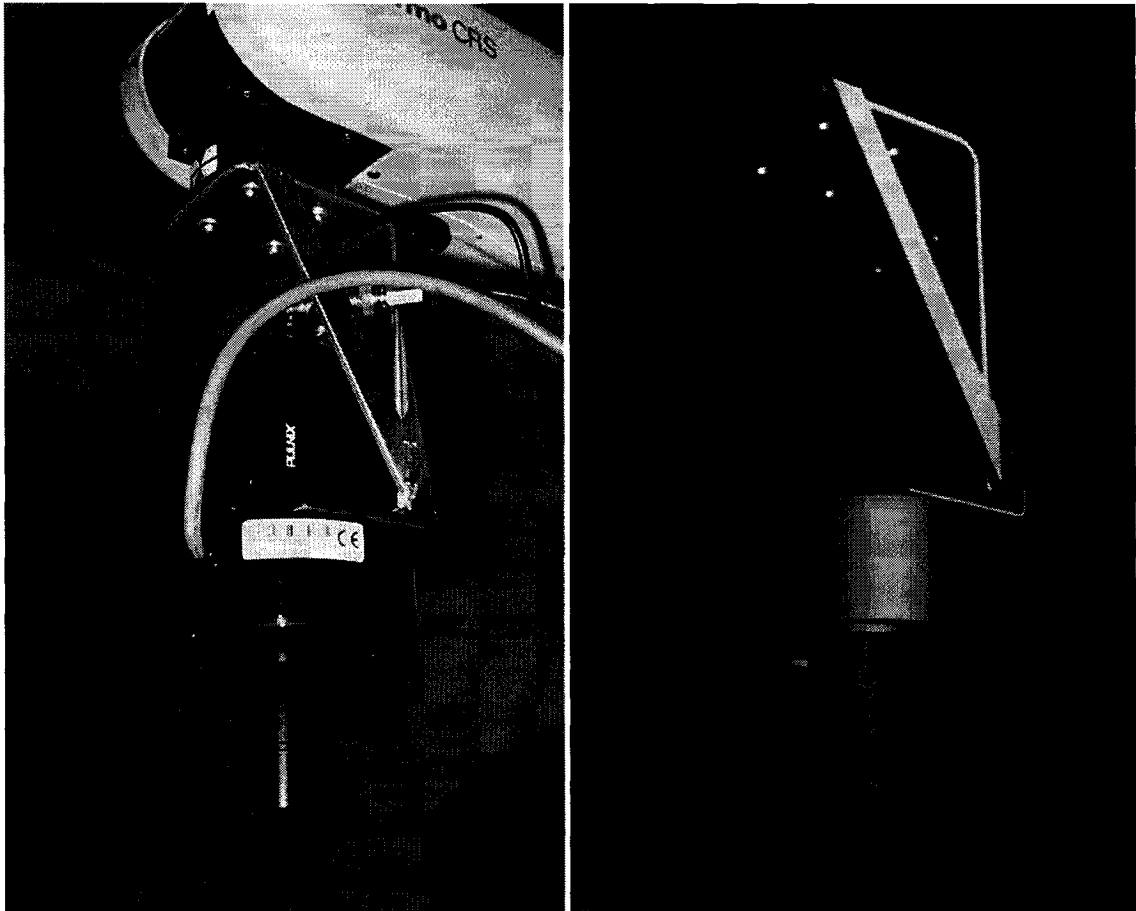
Comparison between the modeled camera/lens/measurement head assembly and the actual assembly.
